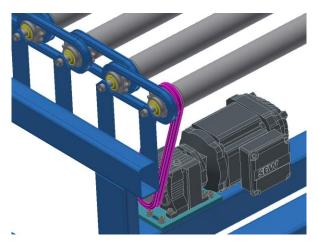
Belt roller conveyor with dimensions in mm.
